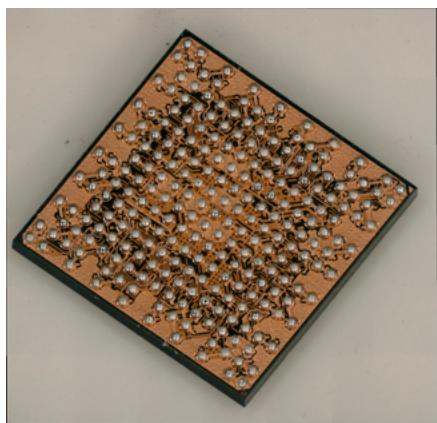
Developed FOWLP: package size = 7x7mm, solder ball pitch = 0.4mm, ball count = 249.
